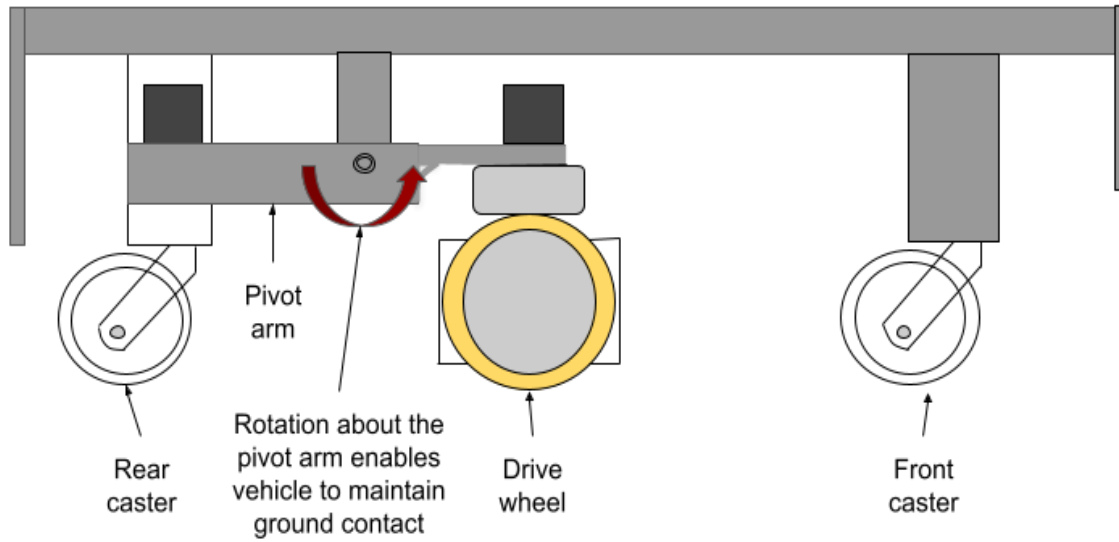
Vehicle frame includes a drive wheel and a caster wheel mounted to a pivot arm
